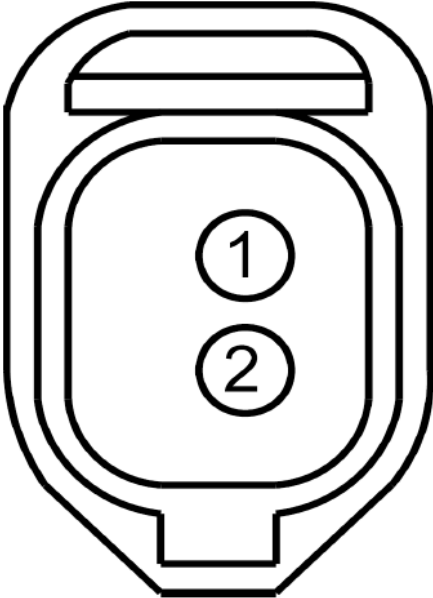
Left Rear Lamp Assembly Connector End View (C414A)
